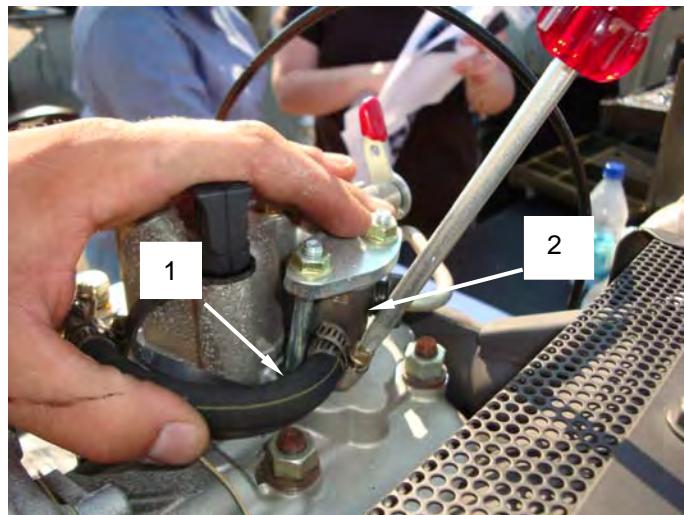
Remove Fuel Hose from Fuel Injector Pump.
